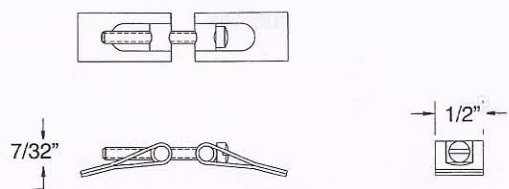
Low Profile Barrel Nut Assembly Welded to Sheath with 6-32 Screw
